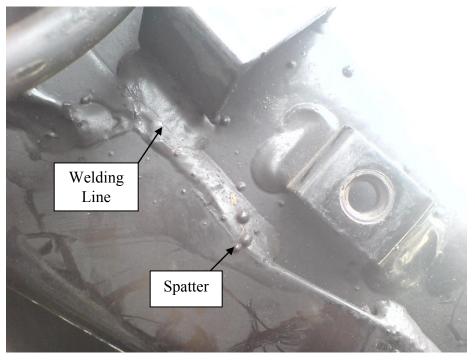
Picture of welding at motorcycle chassis have spatter
